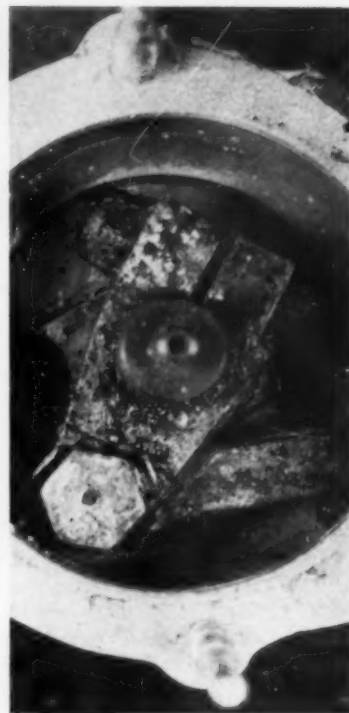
Corrosion of 4130 Steel Parts (Cadmium Plated) Which Comprise the Operating Mechanism for Main Oxidizer Valve. This valve was removed from a rocket engine after 2 $\frac{3}{4}$ hr. exposure to a storable propellant, nitrogen tetroxide
